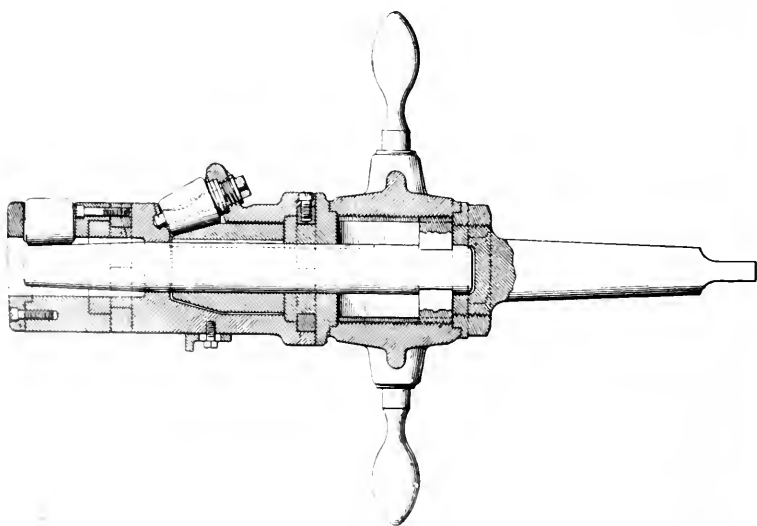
Lovekin patent internal driven expander and flarer with cutter.
